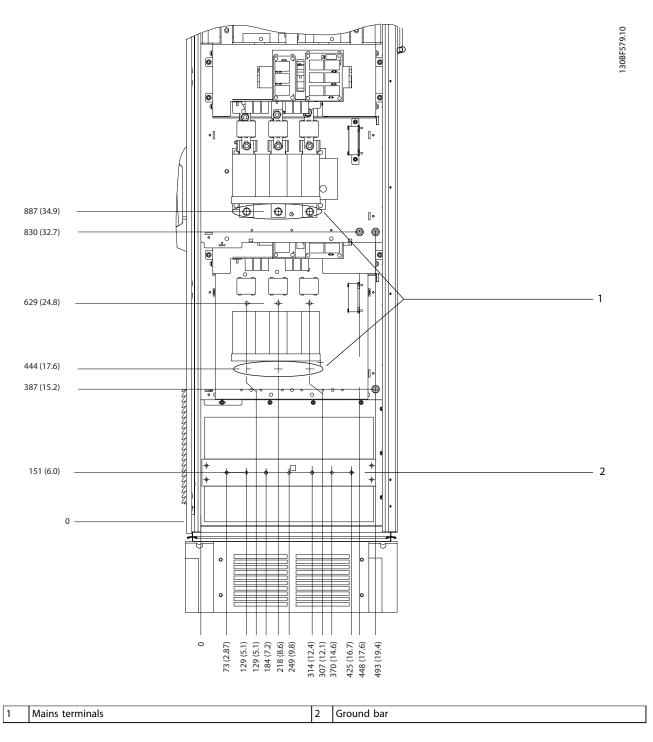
Terminal Dimensions for F9 Options Cabinet, Front View
